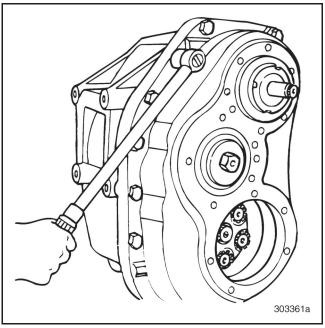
Tightening Rear End Plate Dowel Bolts and Capscrews
